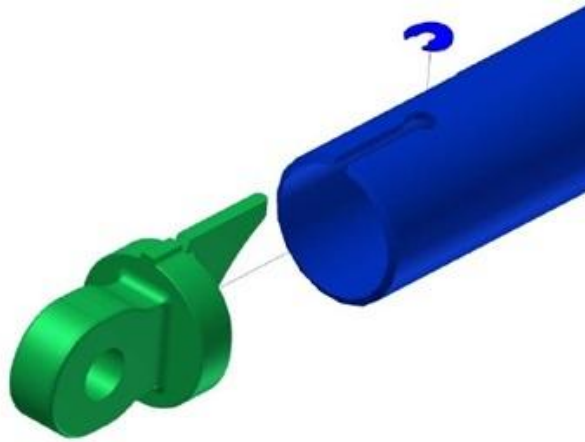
Cast Steel Connection used in Tower Crane Construction [Soderberg 2010]
